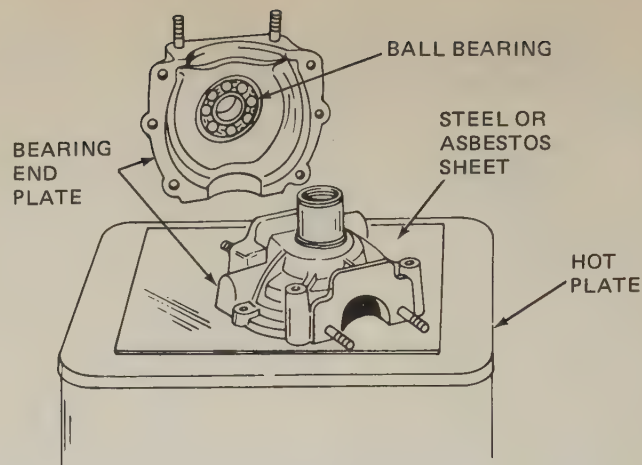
Using a hot plate to heat the crankcase half and make it easy to remove ball bearing. (Tecumseh Products Company)
